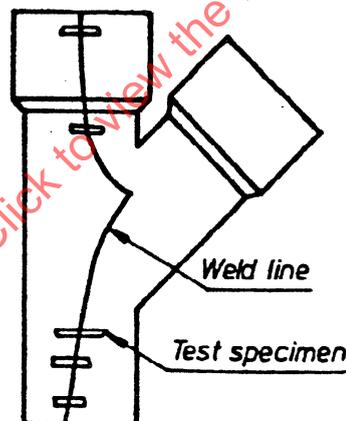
Example on points of sampling when testing the impact resistance of the weld line
